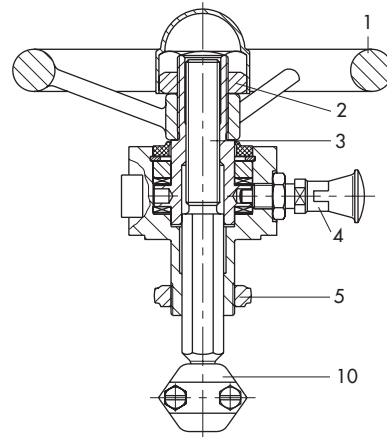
Sectional drawing of Type 3273 Hand-operated Actuator
